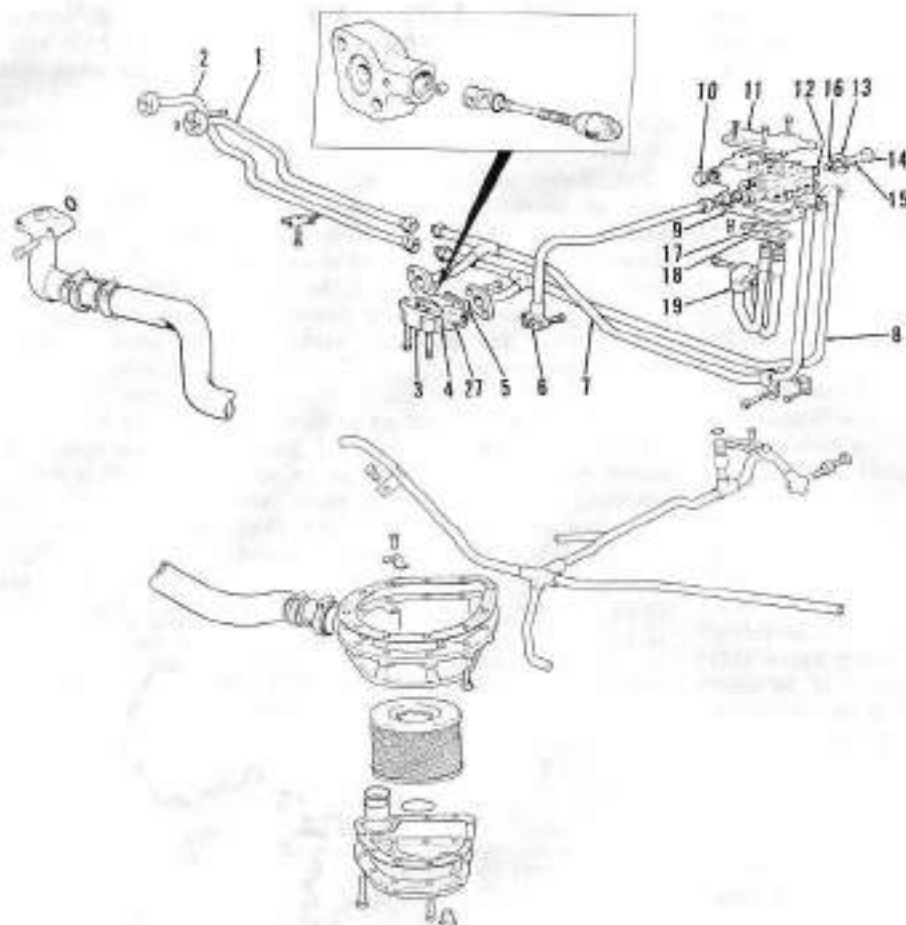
Exploded view of high pressure hydraulic lines for models with dual hydraulic pump; pump suction lines, filters and lubrication line are as shown in Fig. 314 for models with single hydraulic pump. Combining valve (14) separates flow of one pump to tractor hydraulic piston and flow of second pump to remote control valve, or combines flow of both pumps to remote control valve.
